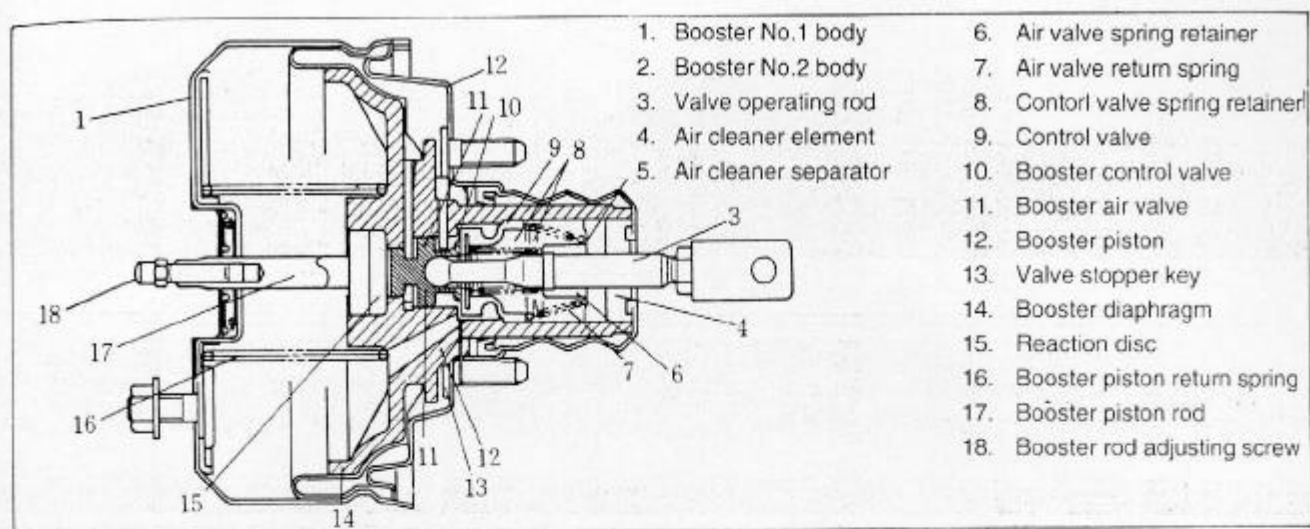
15 VACUUM BOOSTER ASSEMBLY
